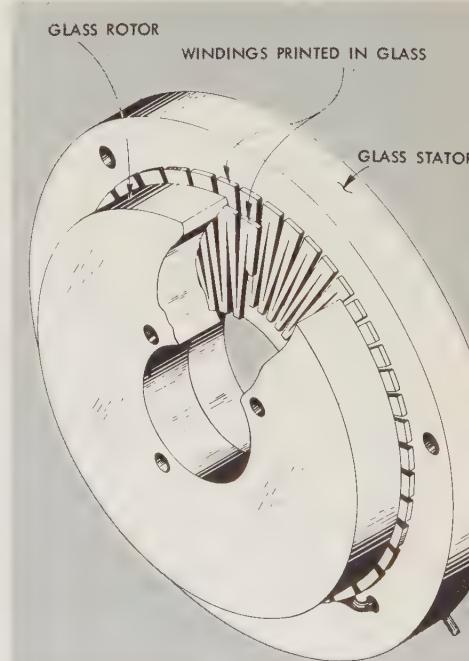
The test stand uses two resolvers of the type illustrated here. A 12-in. diameter, 360-pole resolver is used for tilt measurement and a 7-in. diameter, 360-pole resolver is mounted at one end of the input axis shaft to measure rate.
